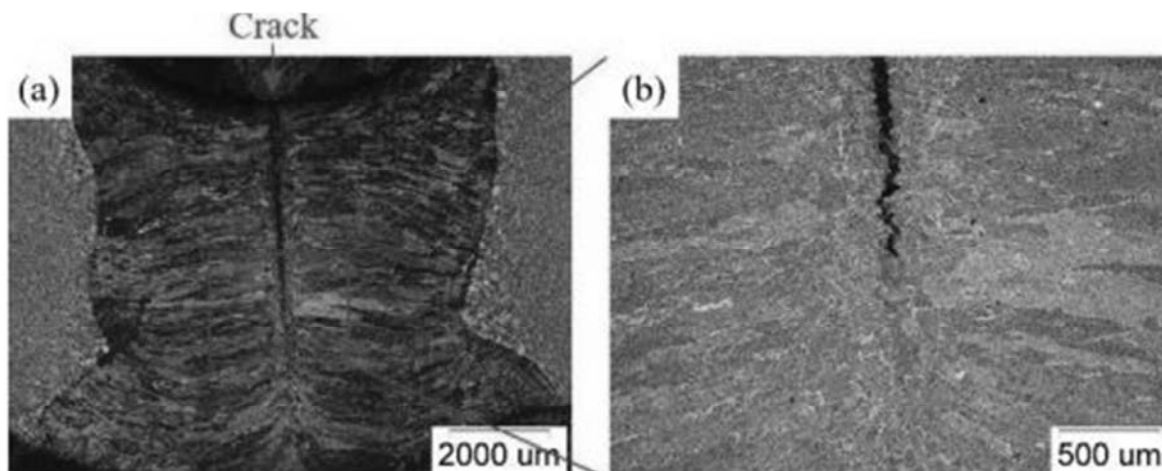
Cross section of hot crack specimens produced by weld metal A and high current (280 A): (a) weld cross section and (b) enlarged view of hot crack observed in the weld centerline
